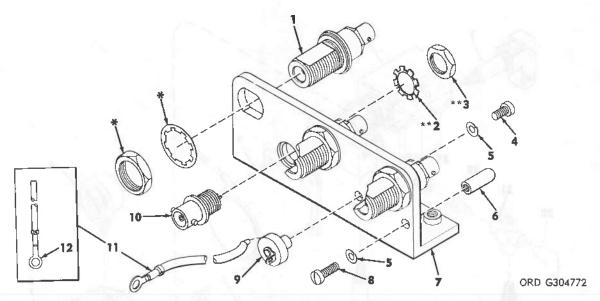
CHASSIS /9008013/-EXPLODED VIEW /SEE FIGURE 83 FOR NEXT HIGHER ASSEMBLY/
